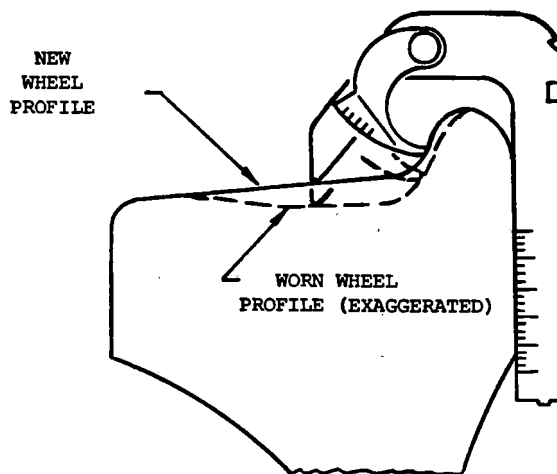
WHEEL PROFILE ILLUSTRATION WITH AAR STANDARD STEEL WHEEL GAGE
